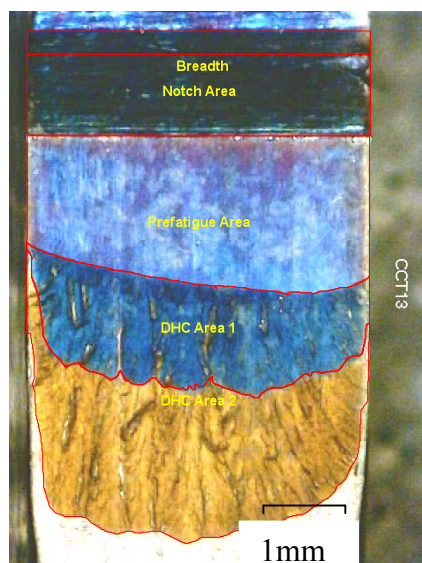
Fracture surface of CCT specimen CCT-13 shows two DHC crack zones and a pre-crack by fatigue cycling.
